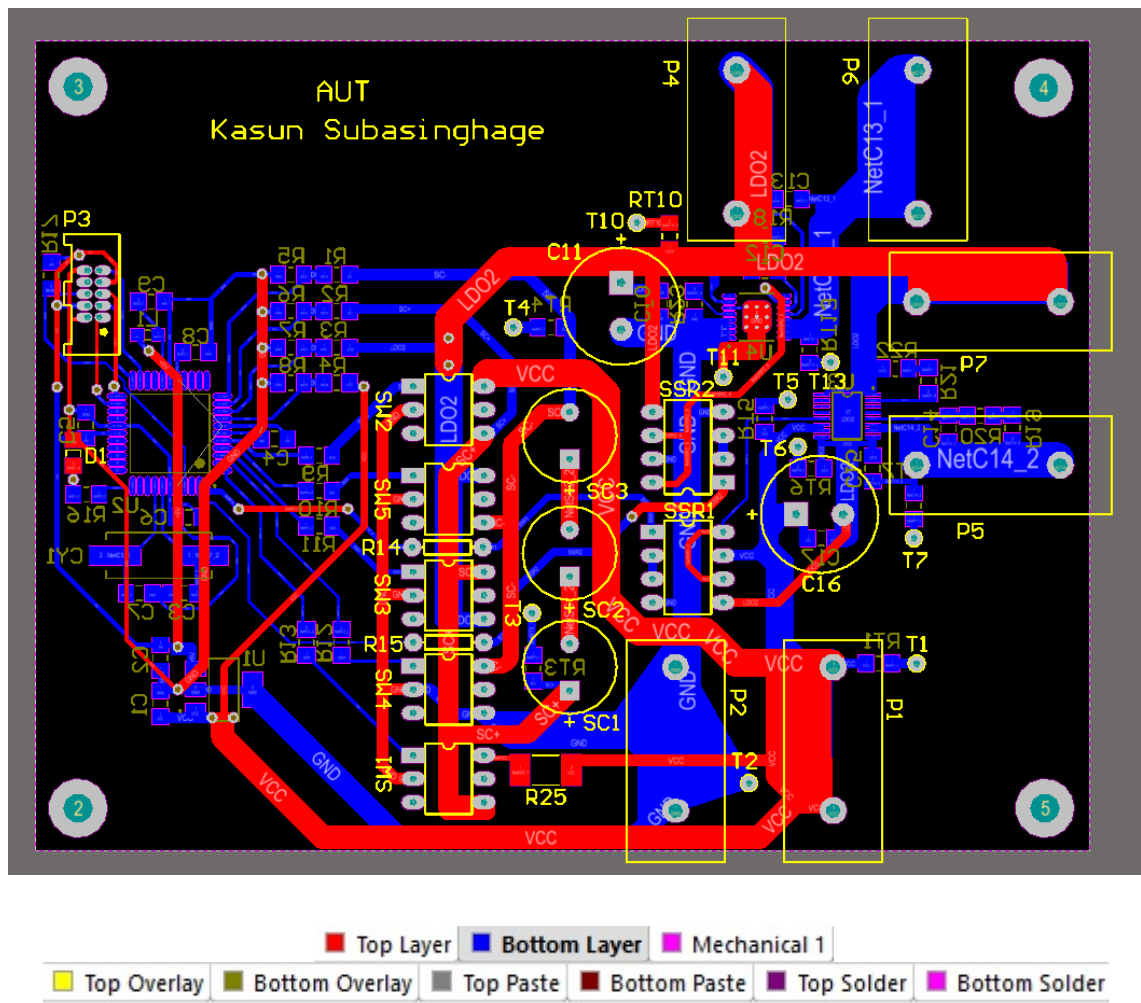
The PCB design of the 12 V to  $\pm 5$  V DO-SCALDO regulator.
